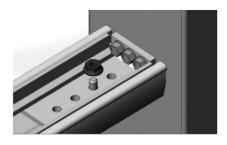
DRILL SIDEWALK BOLT HOLES
